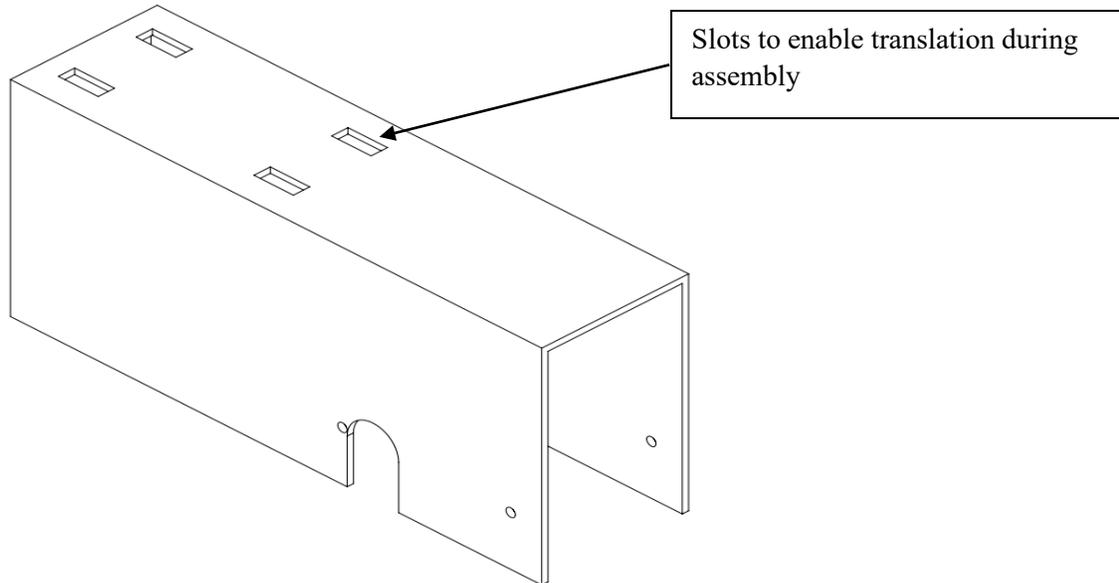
Overall housing for second-generation automated blend valve assembly
